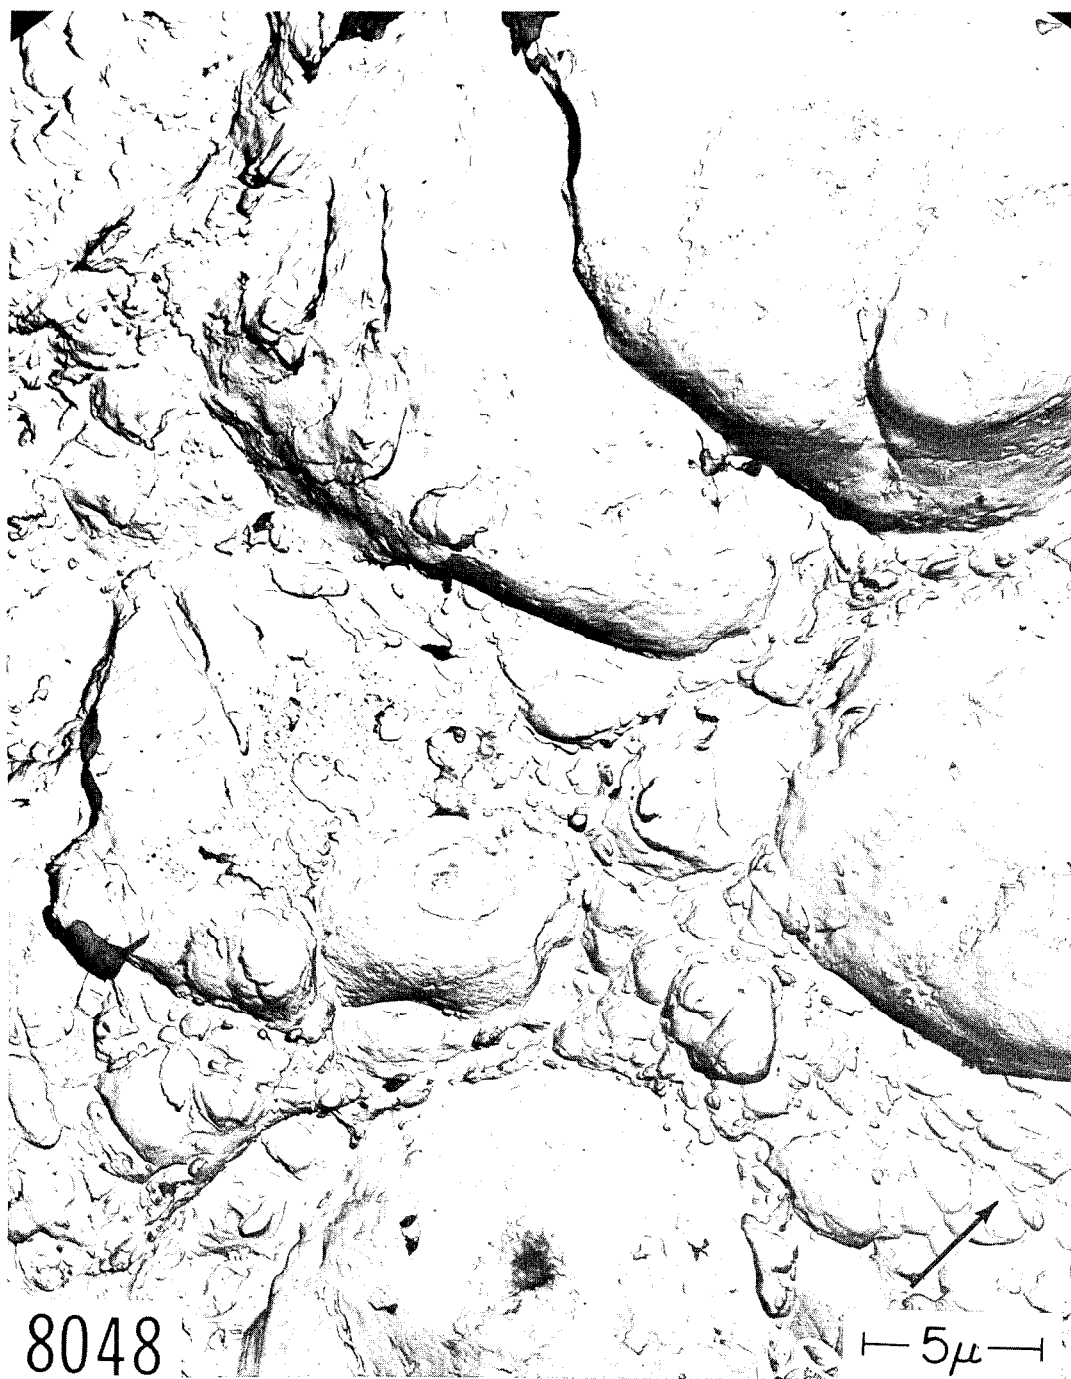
Equiaxed dimples in the square monotonic fracture portion of the HY 80 specimen shown in Fig. 90. Cellulose acetate-carbon replication technique. Palladium shadowed. 6000X.
